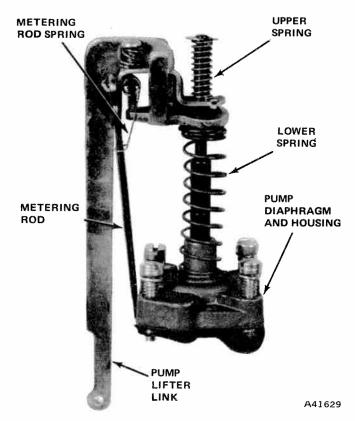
Accelerator Pump and Metering Rod Assembly
